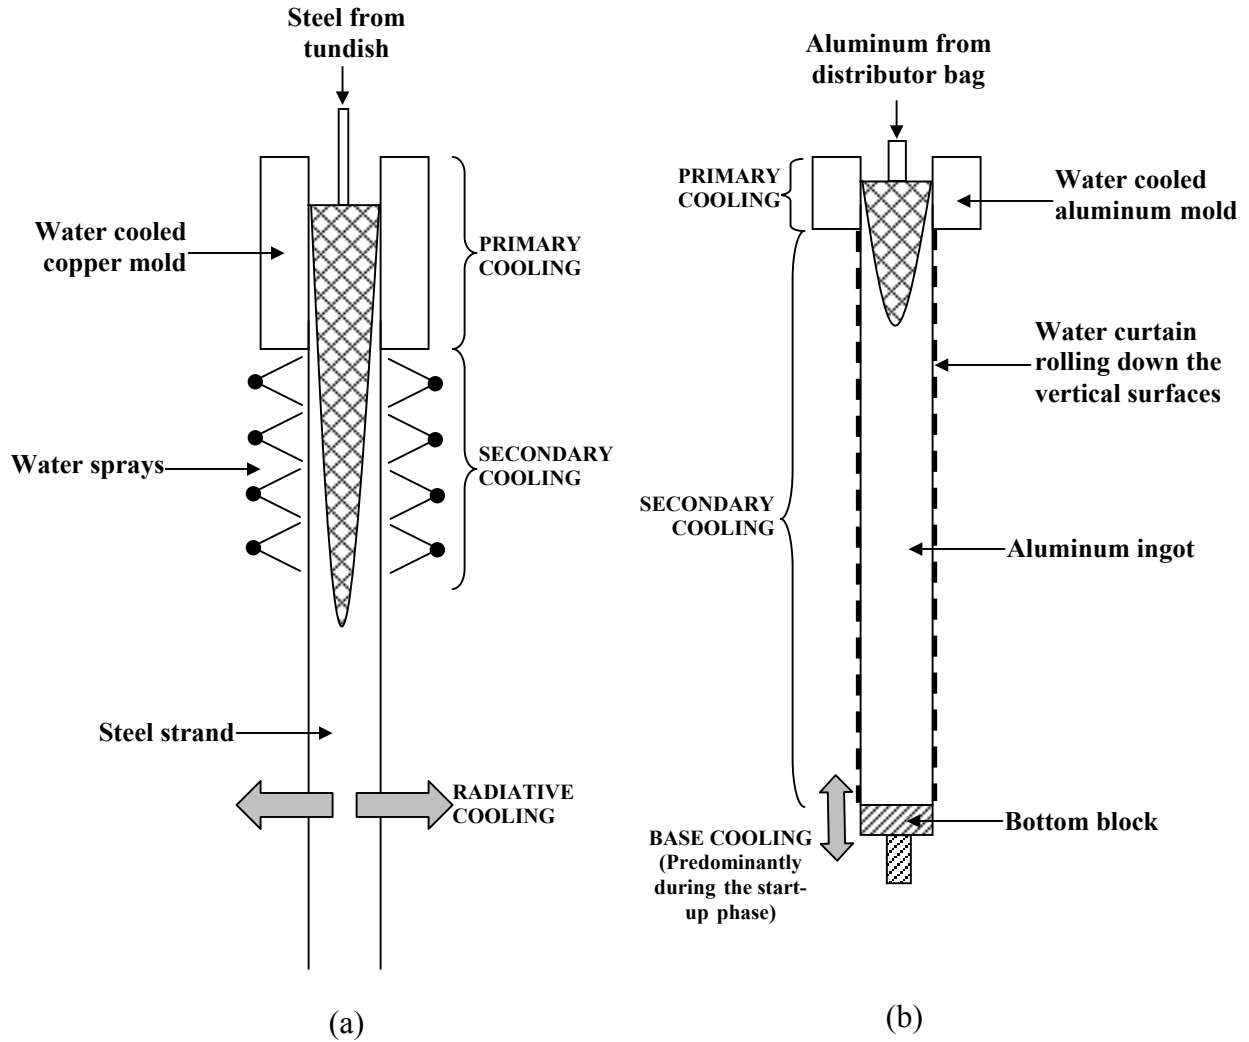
Schematic of cooling processes, for (a) continuous casting of steel^[14] and (b) D.C. casting of aluminum^[5].
